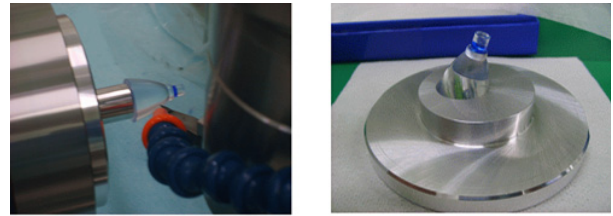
Diamond Turning Machining of DCPC and Eccentric Jig for DTM
